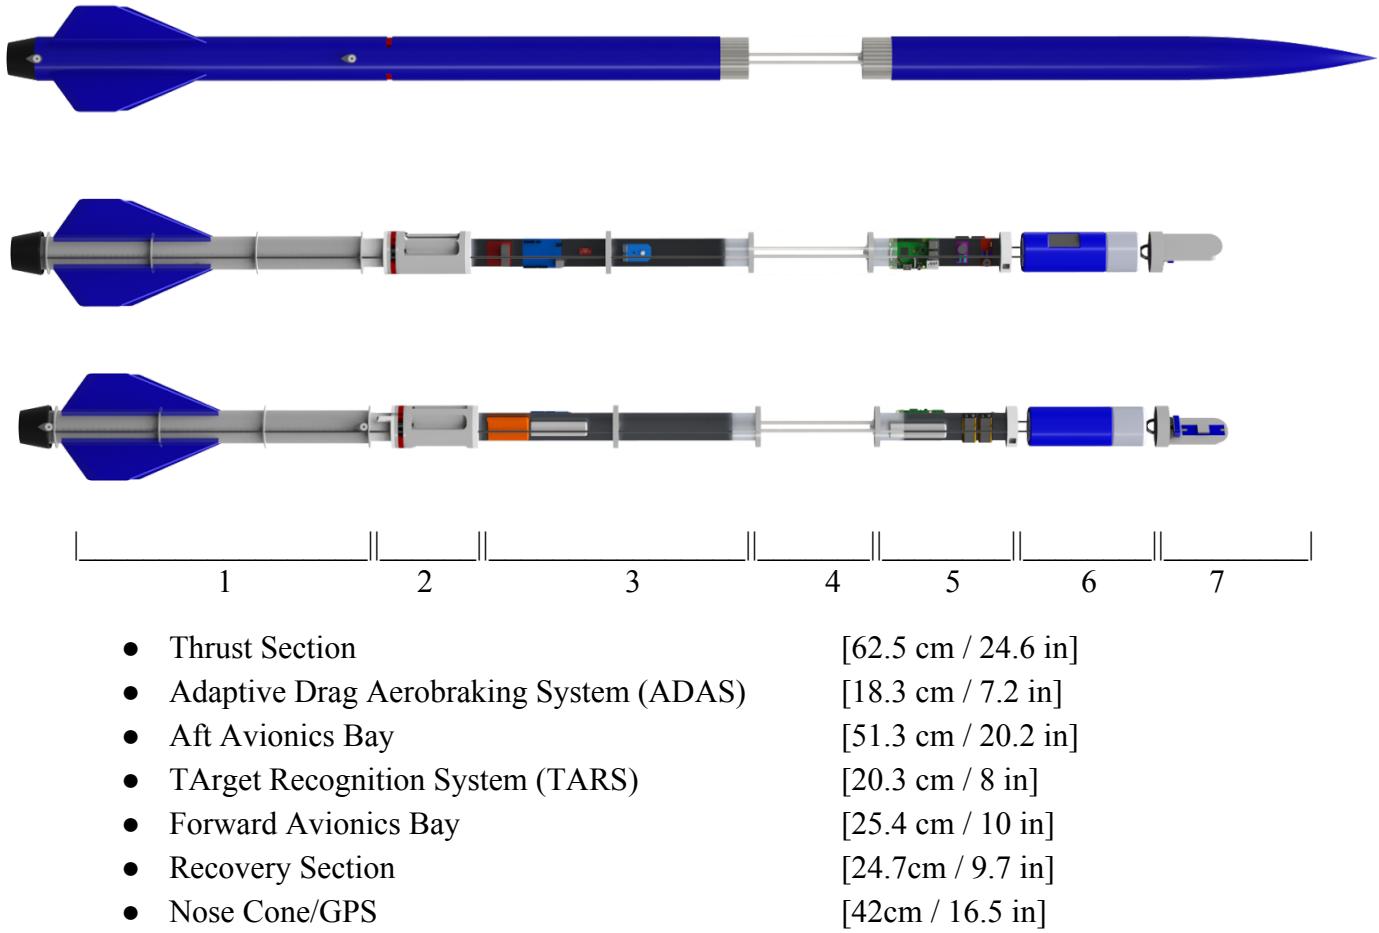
Rocket CAD images and subsystem breakdown with overall length dimensions
